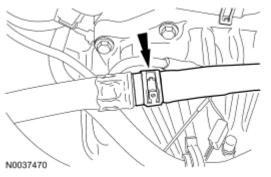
Locating Heater Hose Inline Connector Courtesy of FORD MOTOR CO.
